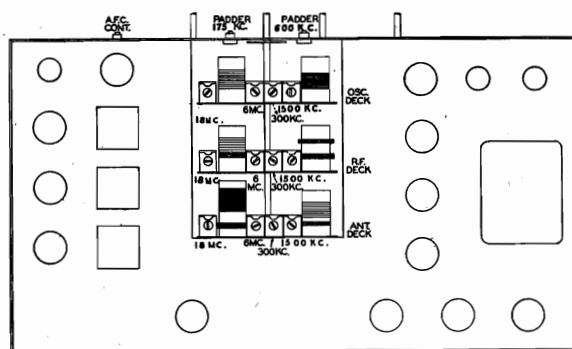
B CHASSIS LAYOUT (BOTTOM VIEW)
